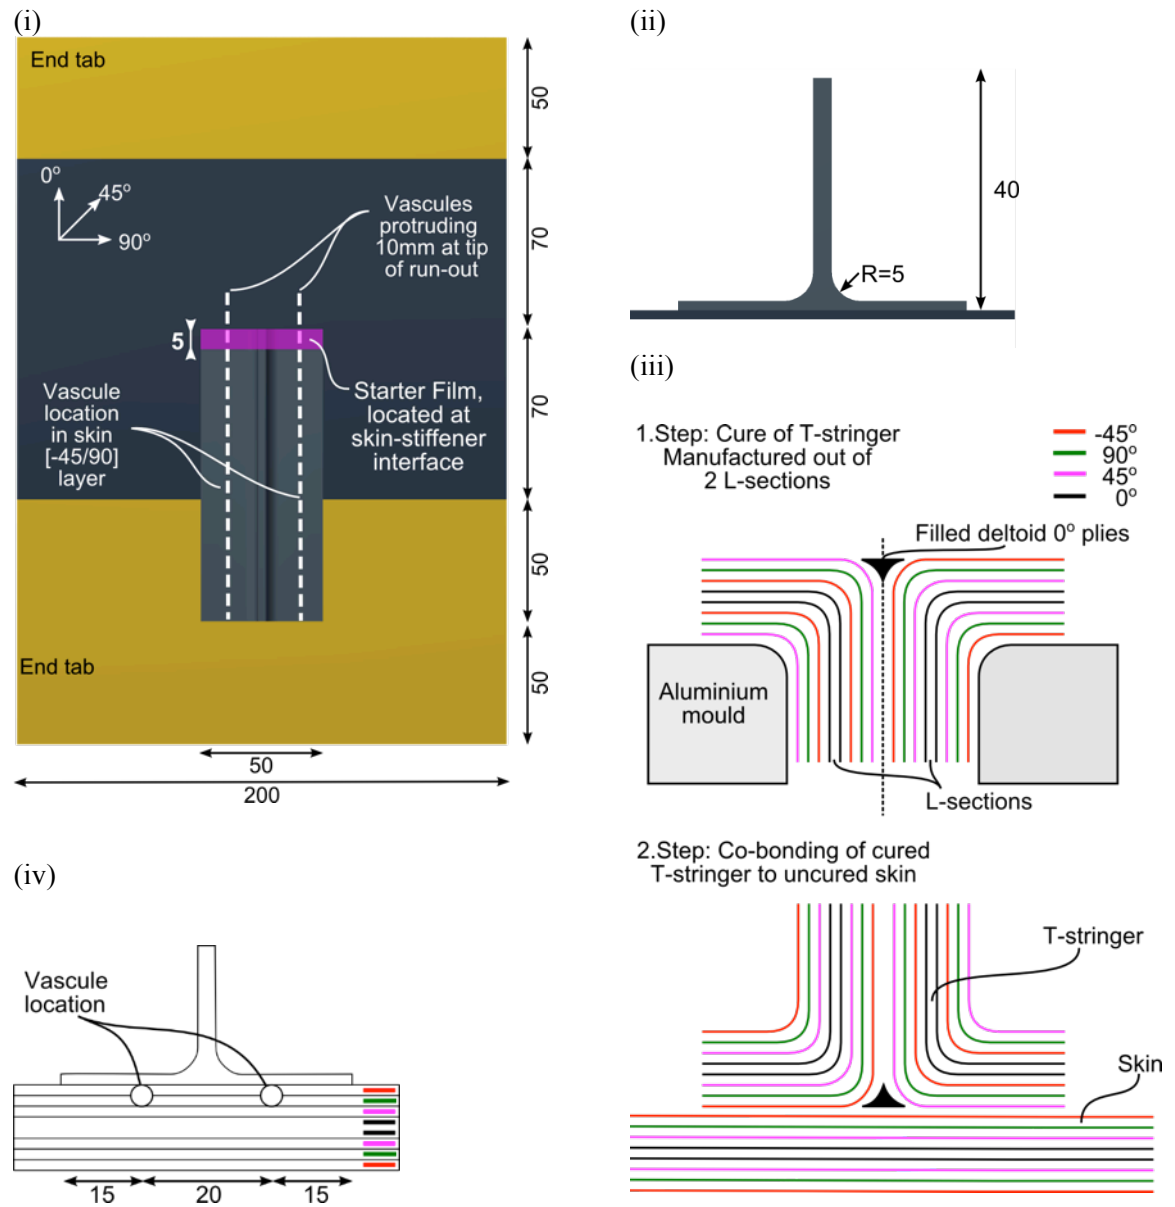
Stringer run-out specimen details. i) specimen dimensions, ii) stringer dimensions, iii) lay-up and manufacturing schema (Note that lay-up orientation refer to the skin of the stringer run out) and iv) vasculature location.
